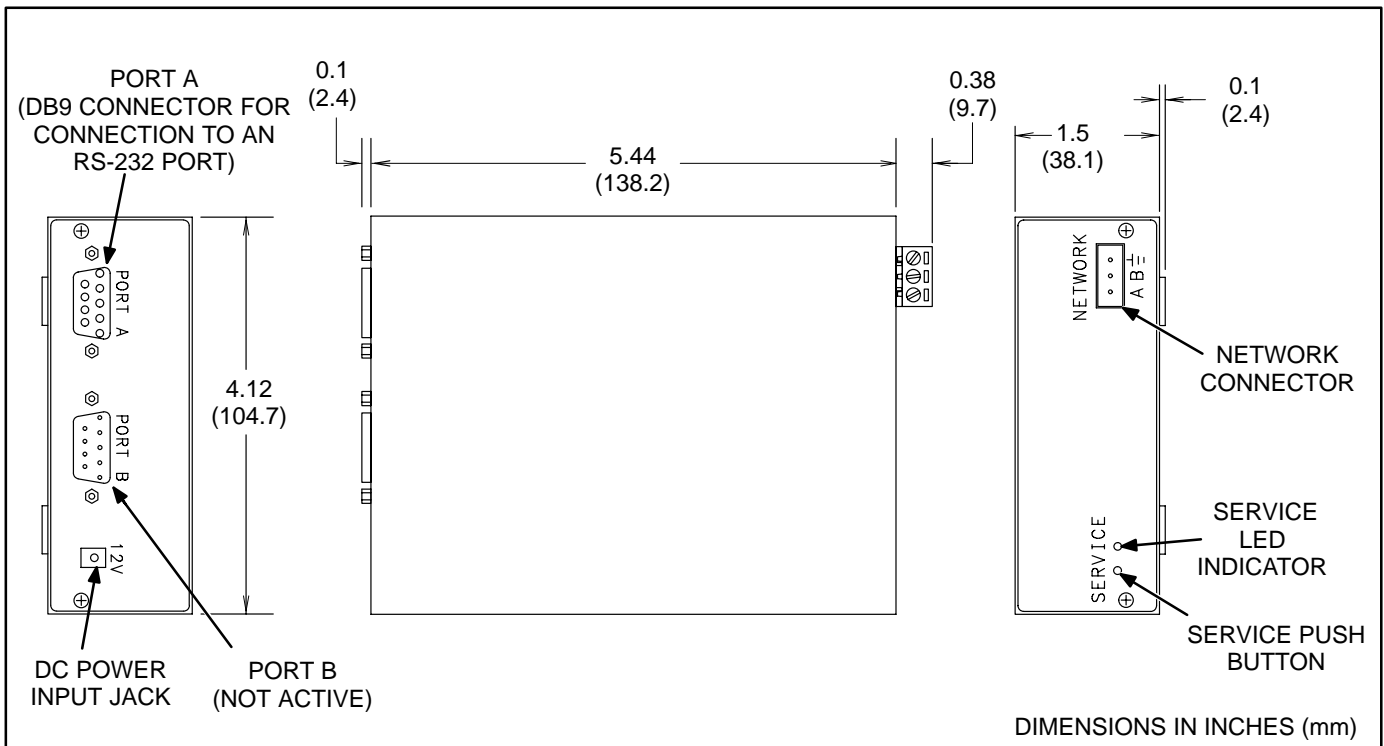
MODLON GATEWAY OUTLINE DRAWING
